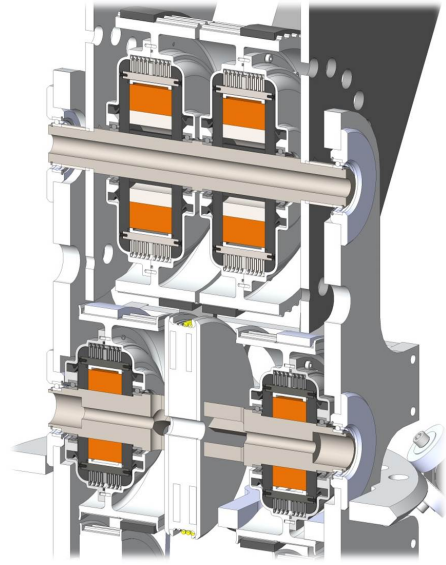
3DOF DASA manipulator showing MR clutches integrated onto the joint shaft.
